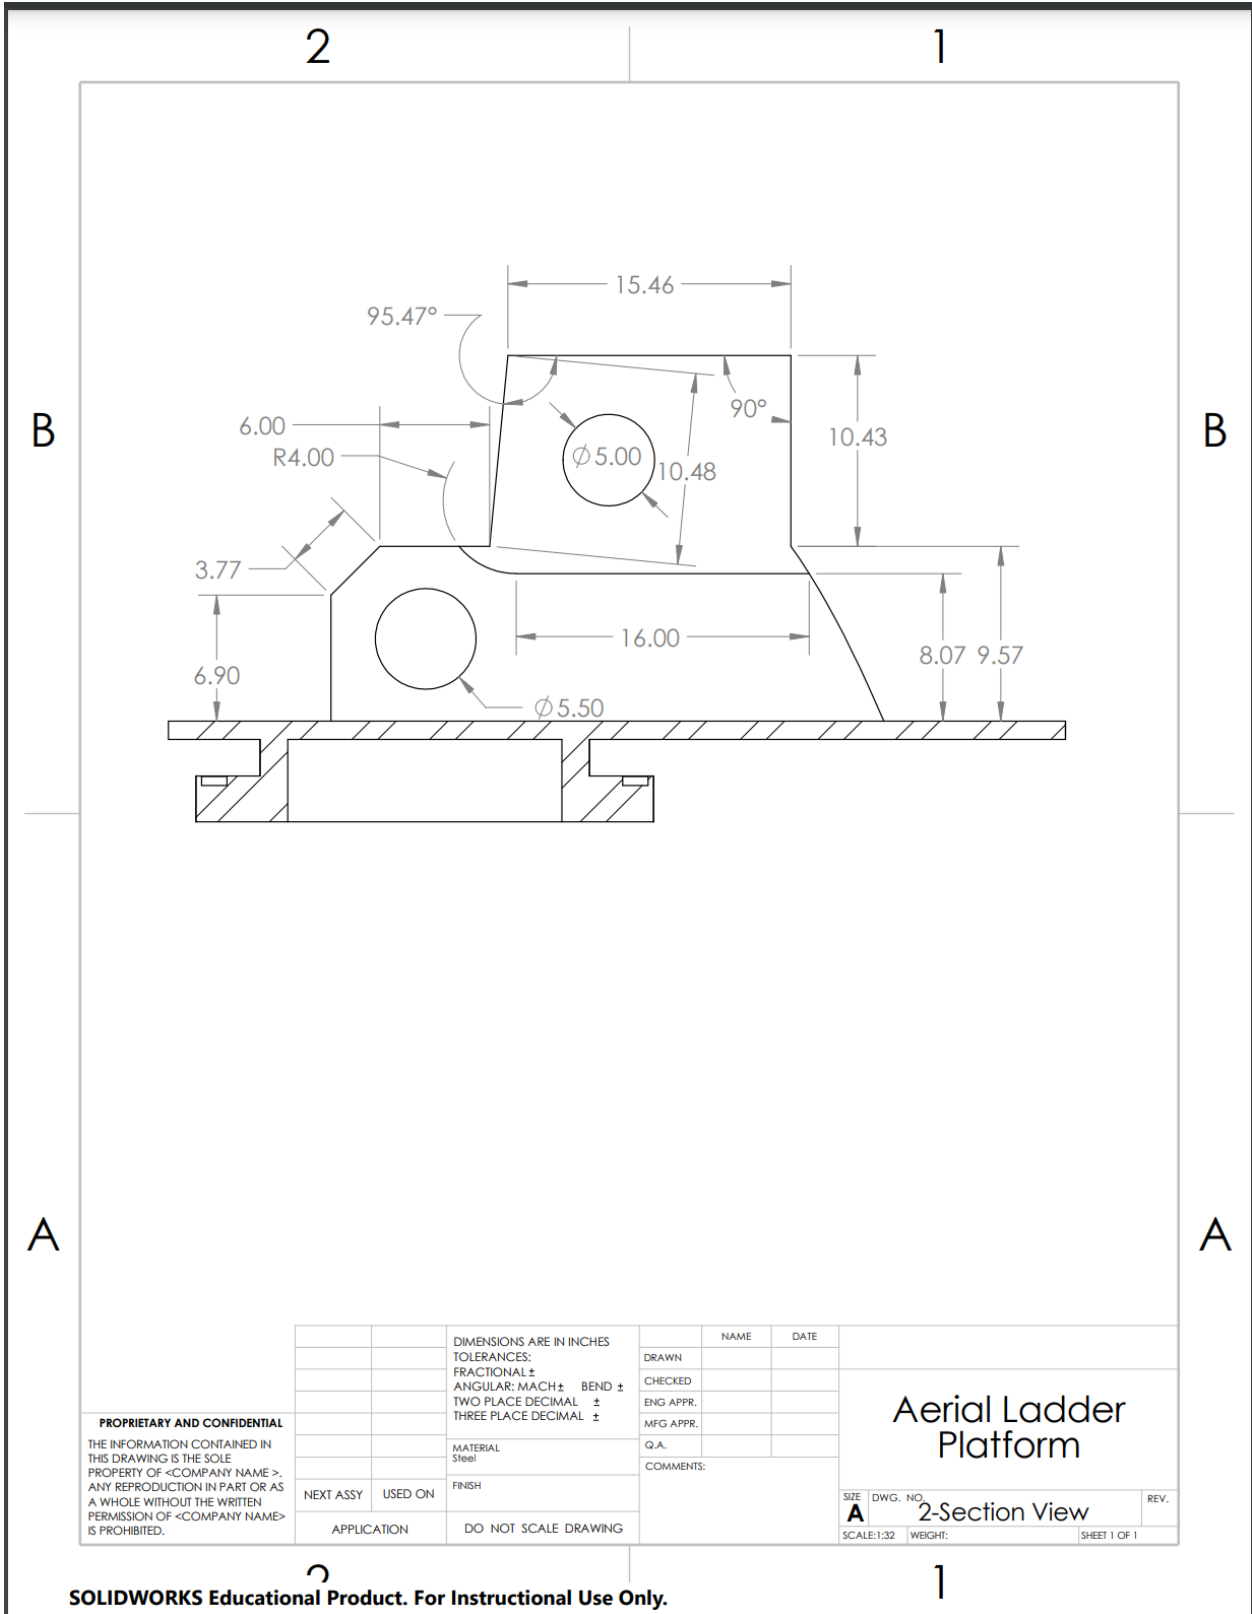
Section View of the Dimensioned Drawing of the Aerial Ladder Platform
